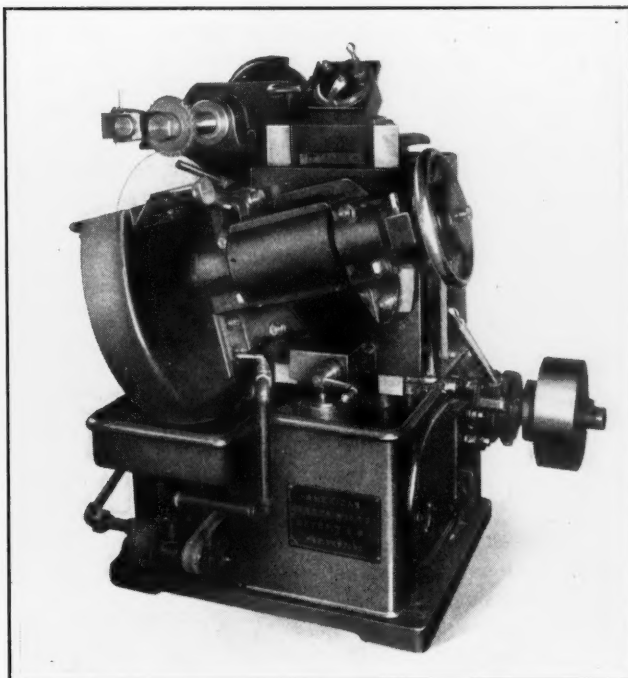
Machine for grinding the Teeth of Spur Gears to obtain Accurate Tooth Form and Spacing, and Concentricity of the Pitch Circle
